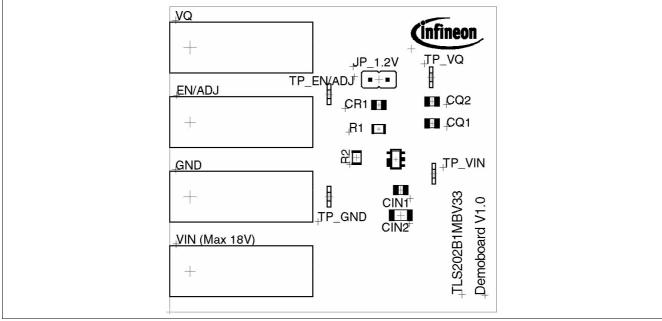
Top Layer components of TLS202B1 Demonstration Board
